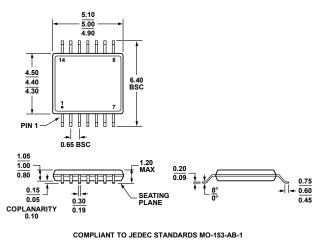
14-Lead Thin Shrink Small Outline Package [TSSOP] (RU-14) Dimensions shown in millimeters
